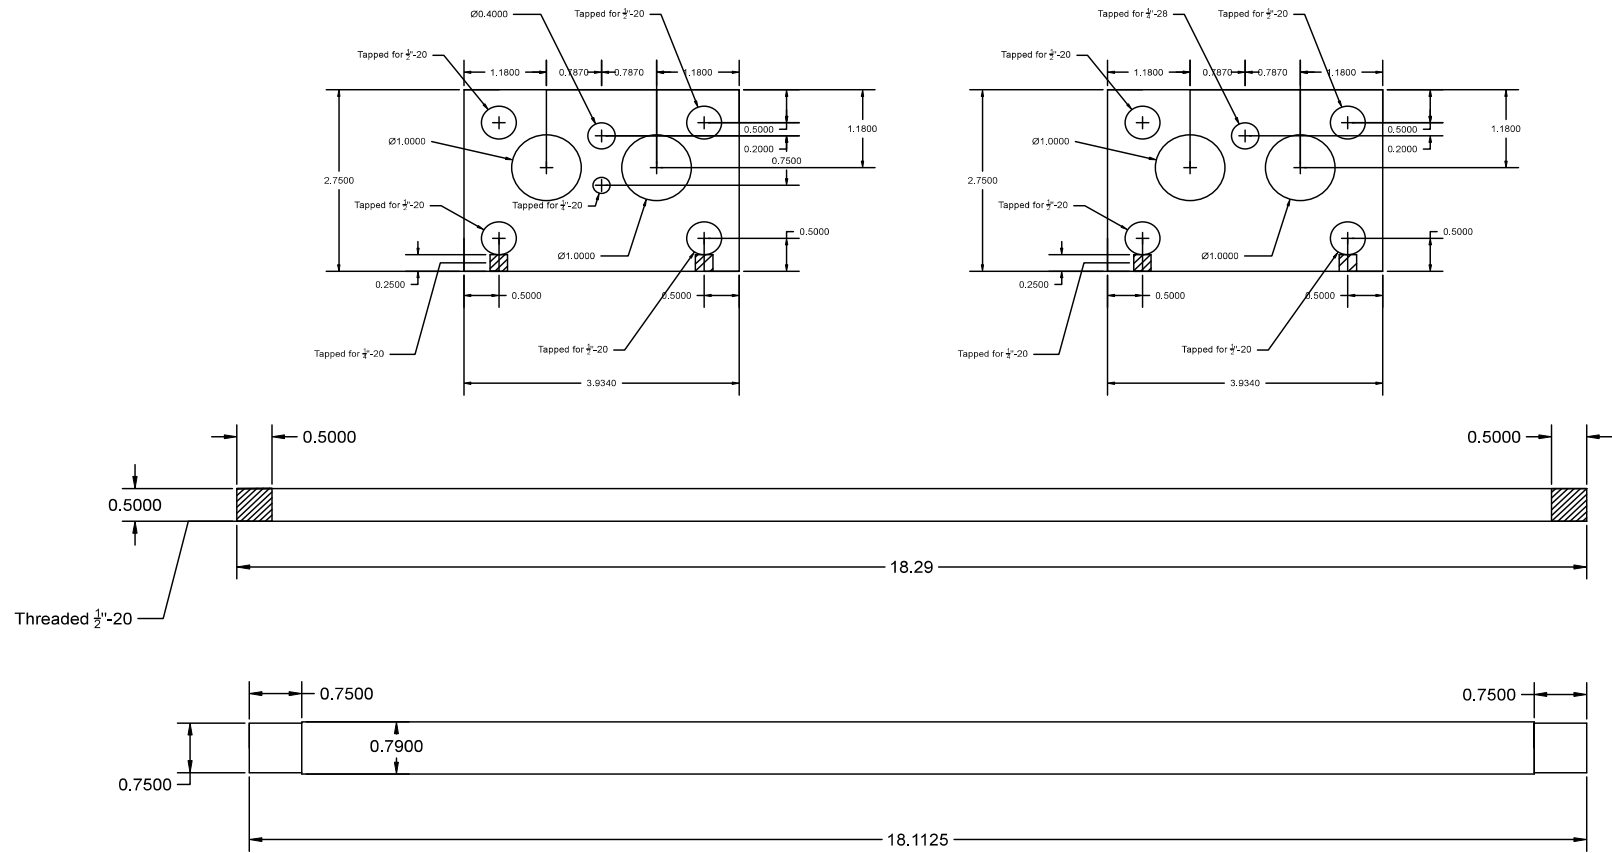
CAD drawing of corrugated tube test rig (version 1)
